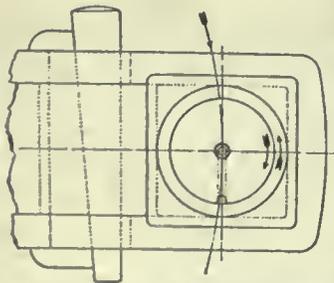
PRACTICAL AND EFFICIENT METHOD OF LUBRICATING A CRANK-PIN BEARING.
